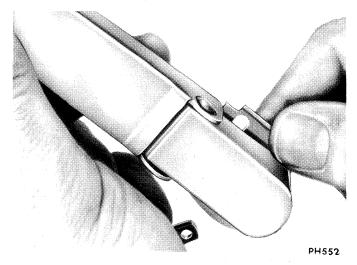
Removing Wiper Arm (R, W, S, X, C Models)
